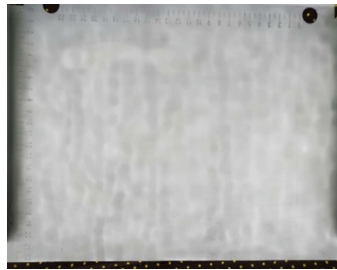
Macro appearance of sandblasting stainless steel plate.
